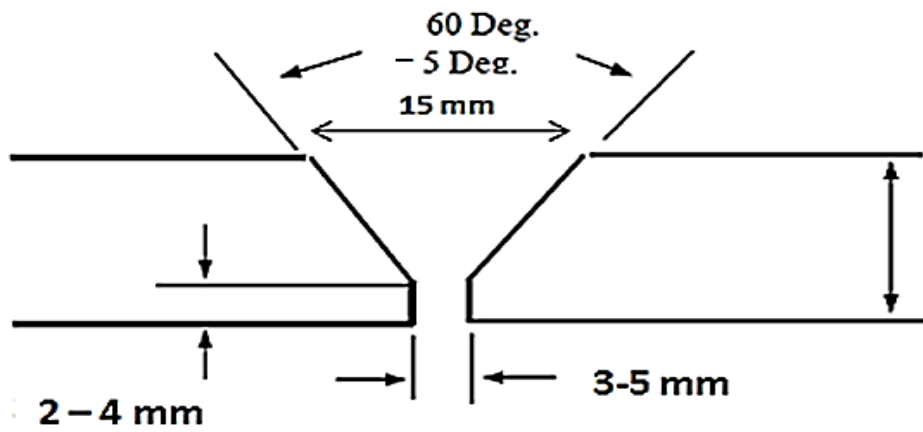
Shows the dimensions of the sample used in the welding process
